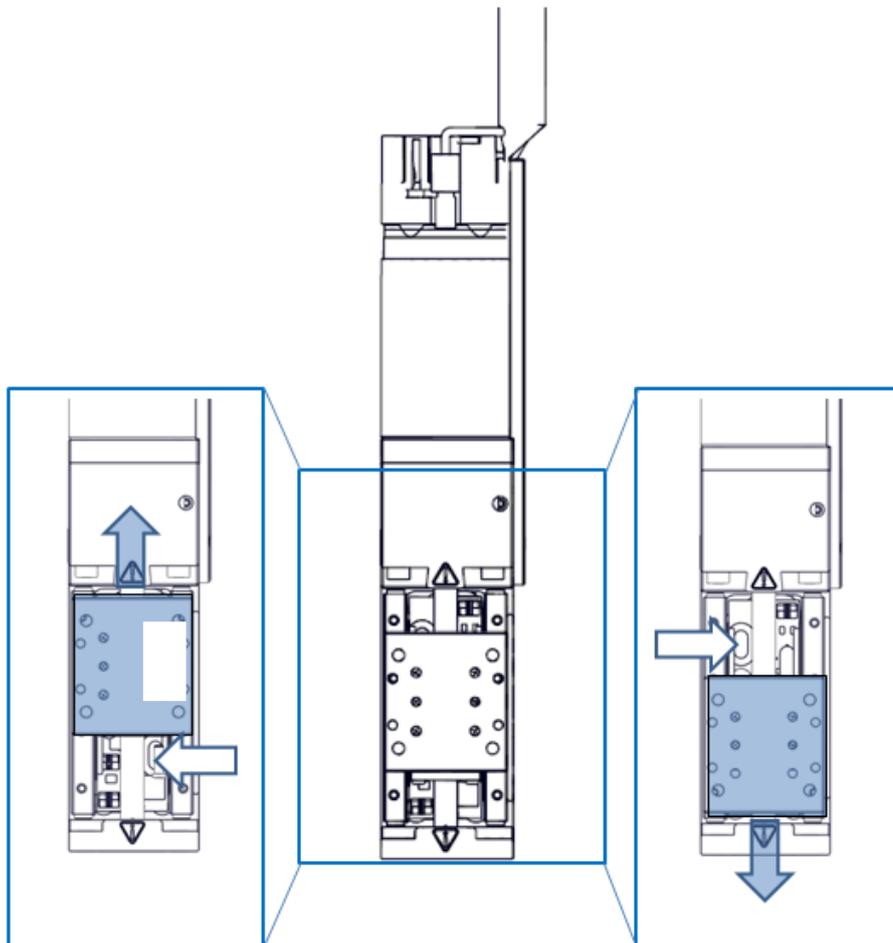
Position of the longitudinal holes for screw mounting and moving the platform
